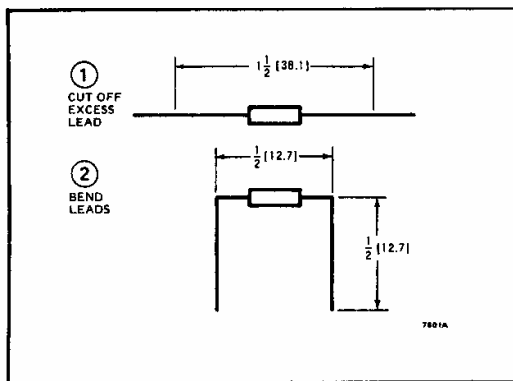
PLUG-IN RESISTOR PREPARATION. DIMENSIONS IN INCHES [MILLIMETRES IN BRACKETS].
